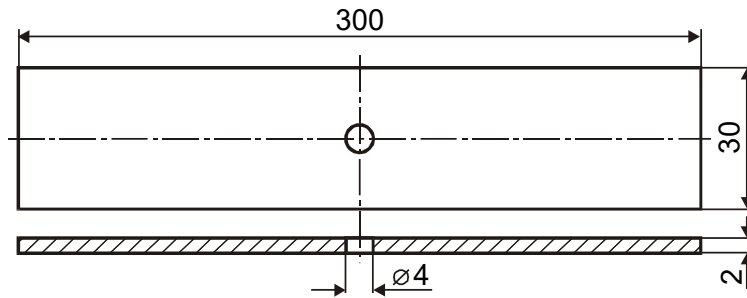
Test-piece structure of plate with cylindrical hole
